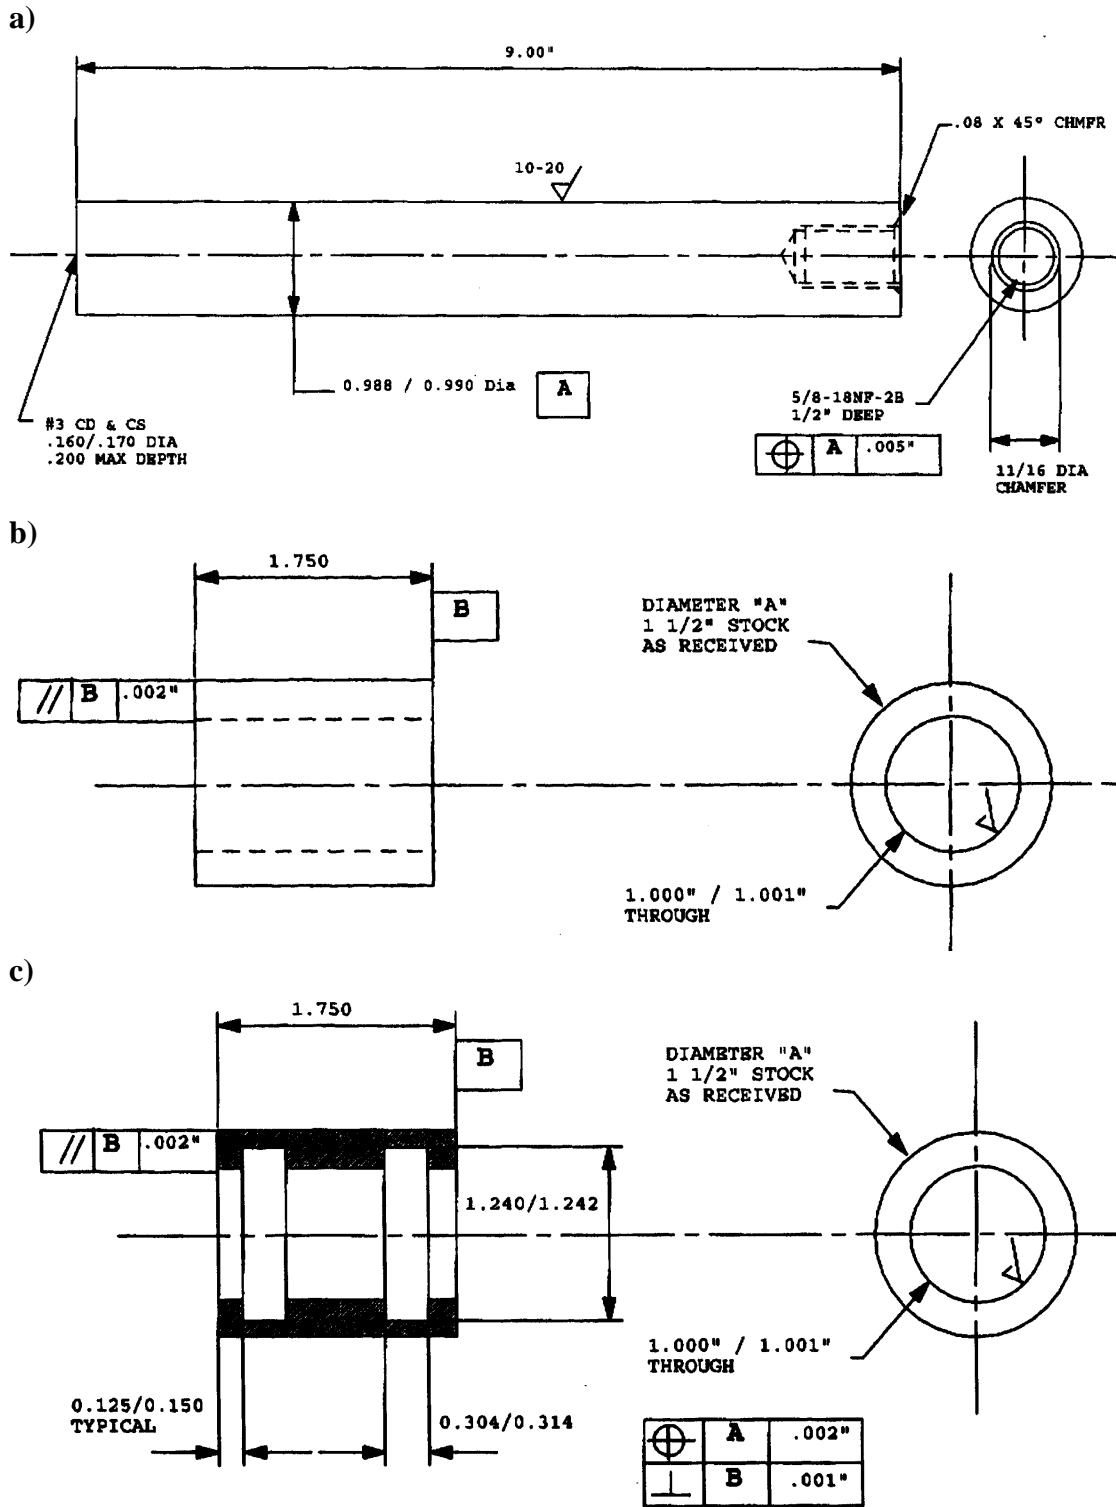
Wear test rods and bushings - a) rod, b) straight bushing, c) seal groove bushing.
